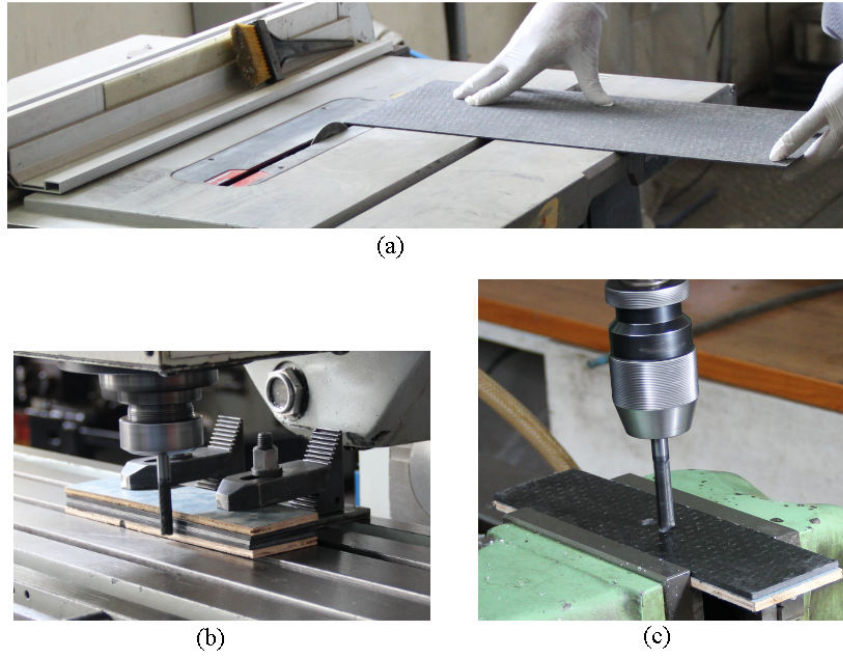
a) Cutting of laminate into specimens using saw machine b) end milling of thickness face of specimen c) hole drilling of specimens
